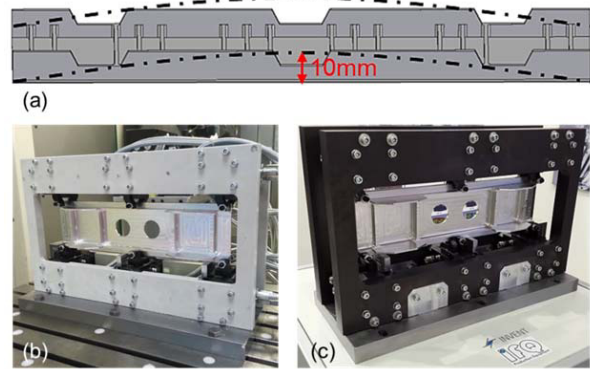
Fixture frames for thin-walled aerospace structural parts; (a) distortion profile, (b) steel fixture frame with PosiFlex clamp, (c) CFRP fixture frame with PosiFlex clamp [INVENT]
